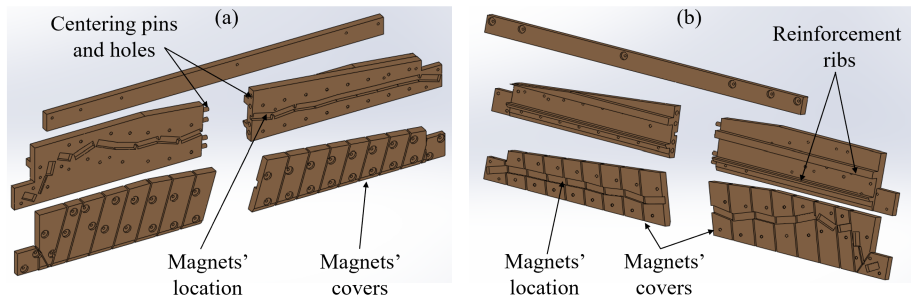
Exploded isometric view of magnets holder type I: (a) front view, and (b) back view.
